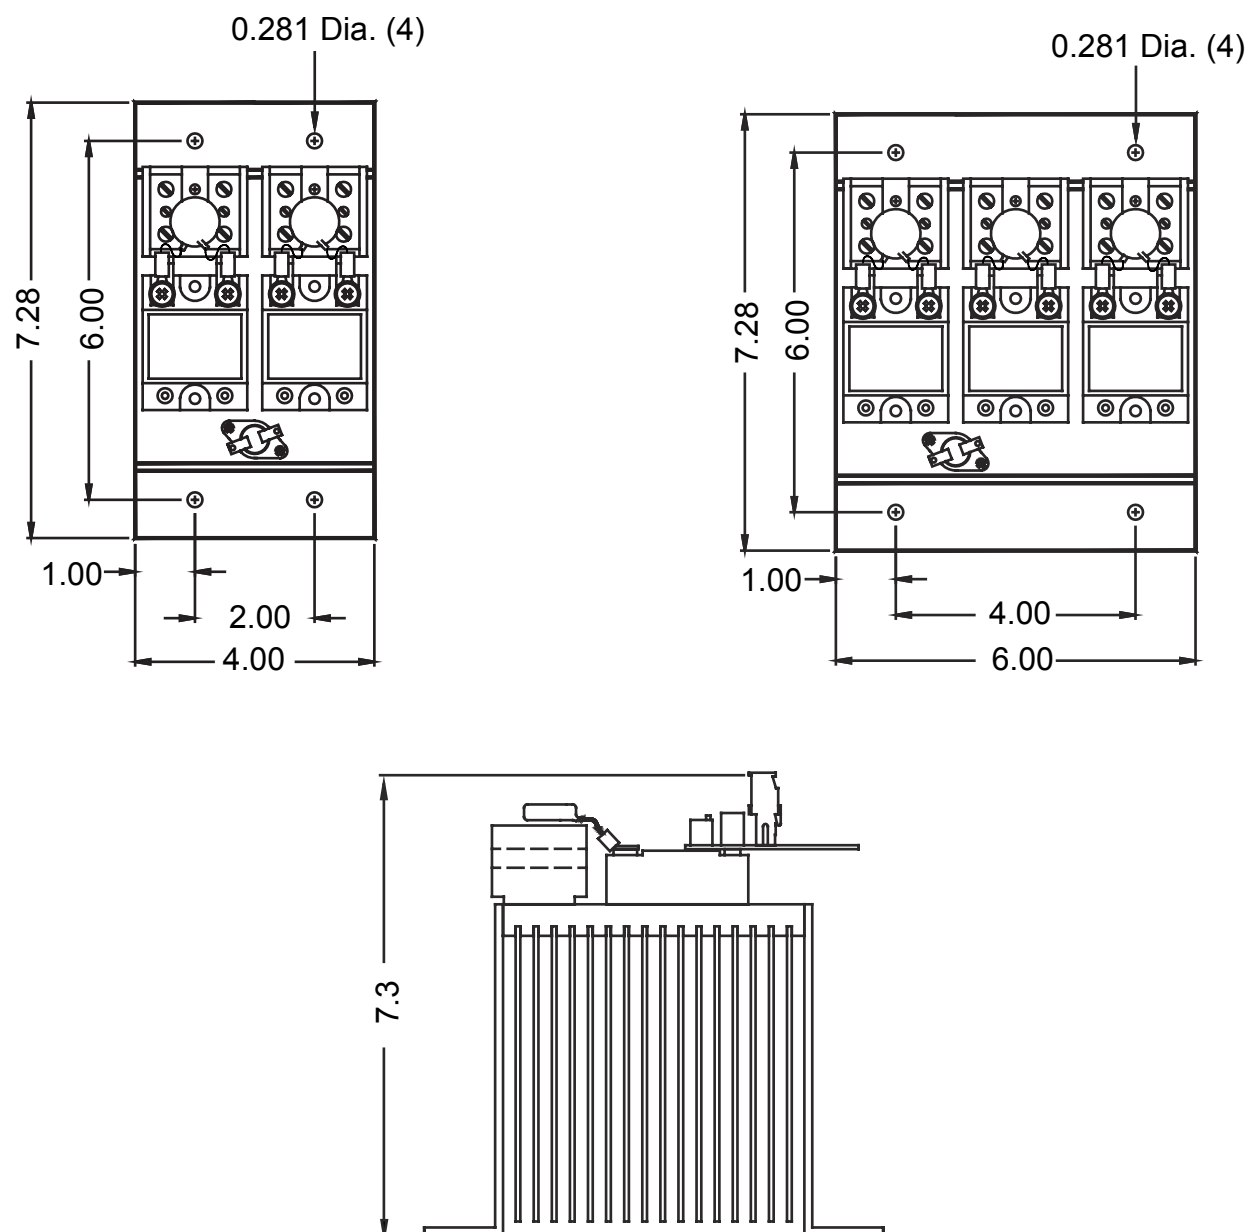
Installation dimensions for the models 1600-PM2 & 1600-PM3
